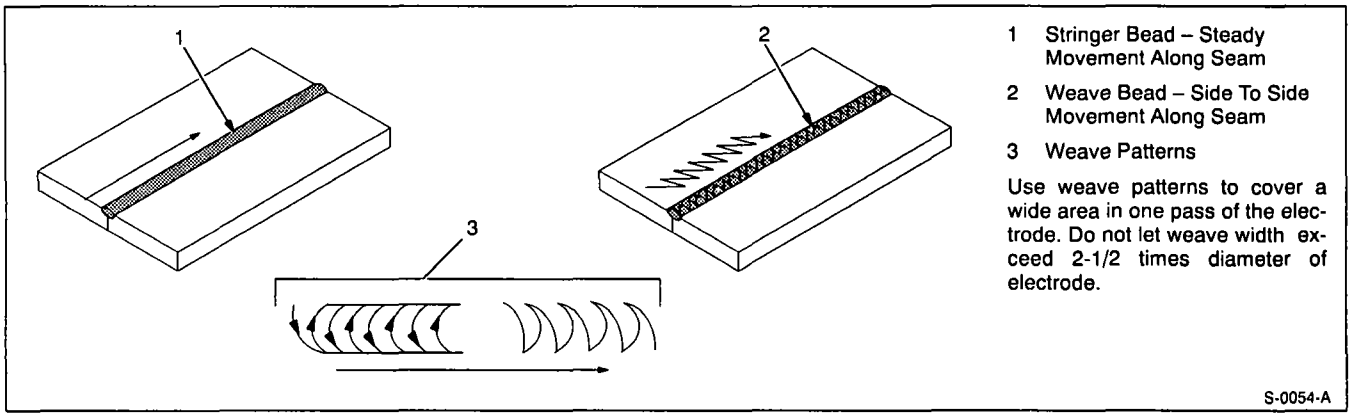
Conditions That Affect Weld Bead Shape
